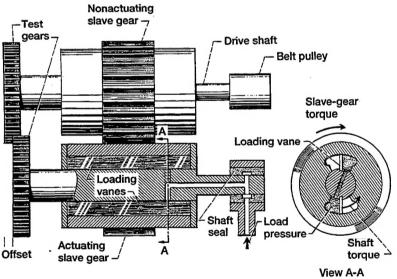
NASA Lewis Research Center's gear-fatigue test machine.
